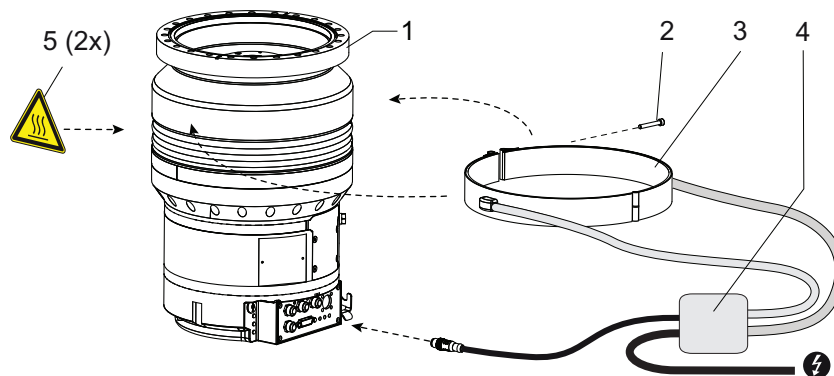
Example: Assembling a heating sleeve on the HiPace 80
